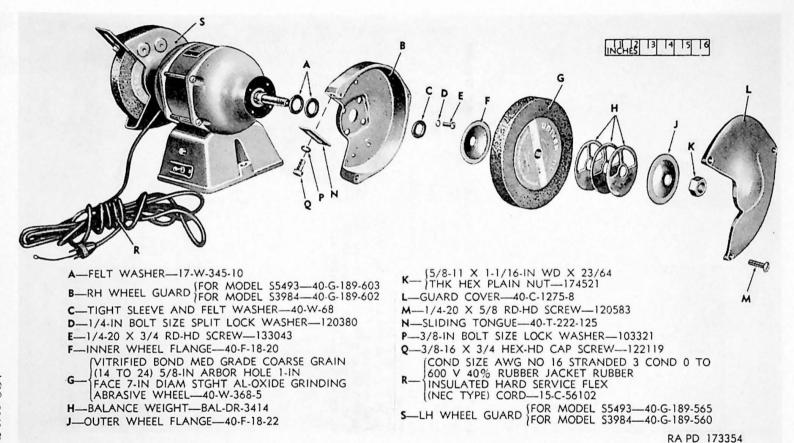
Wheel guards, balance weights, and grinding abrasive wheels.
